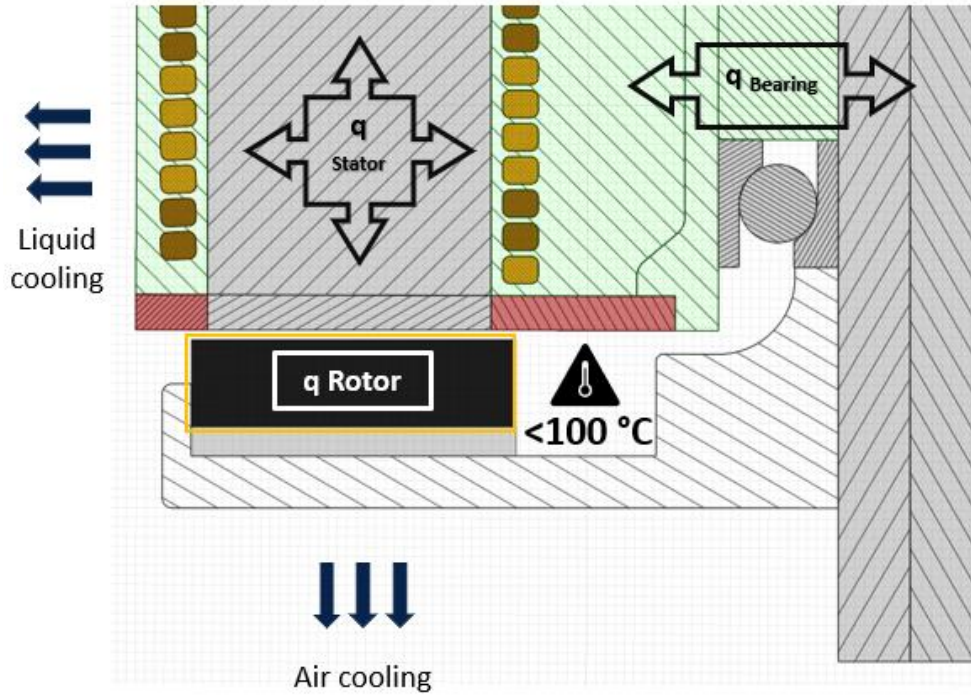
Schematic of AFPM rotor-stator assembly and losses involved.
